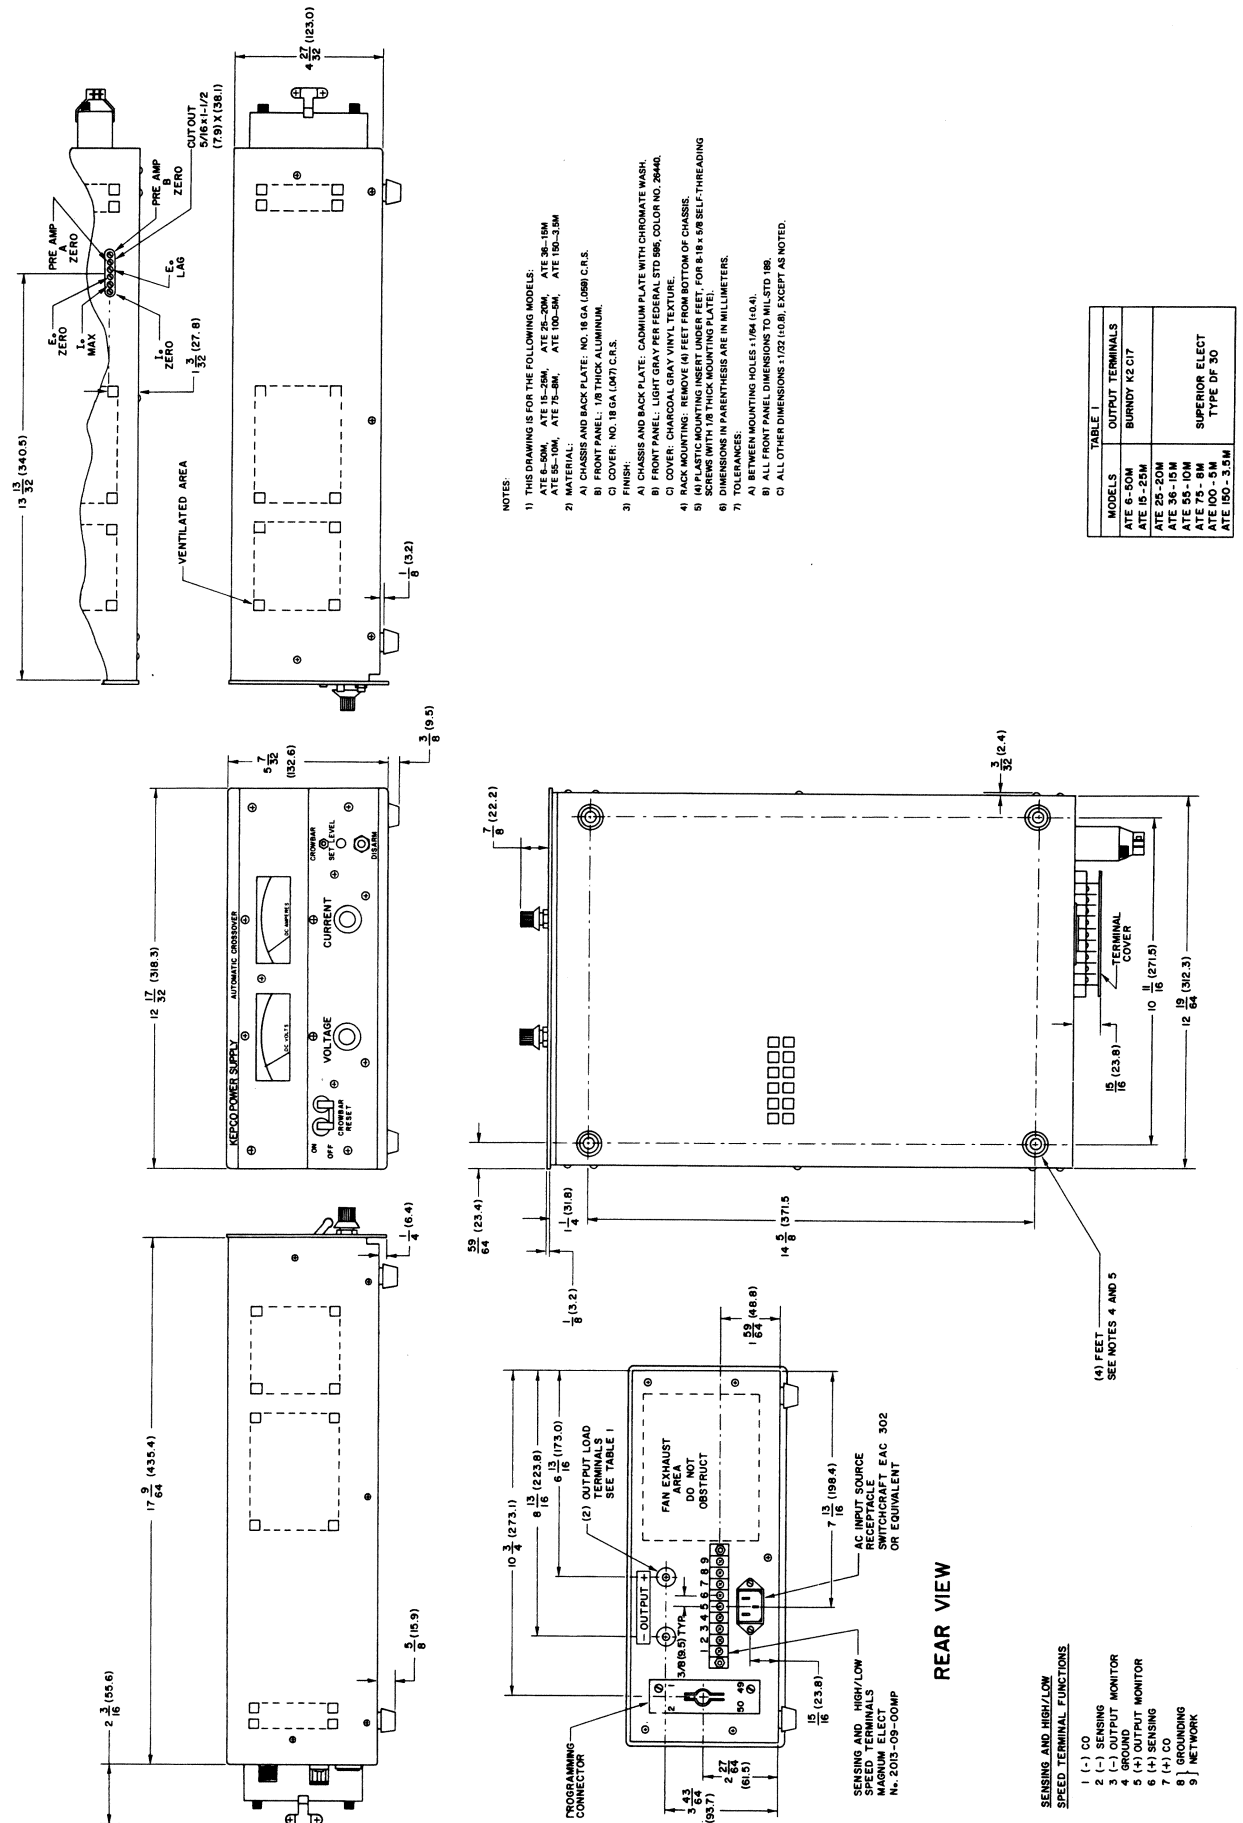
MECHANICAL OUTLINE DRAWING
